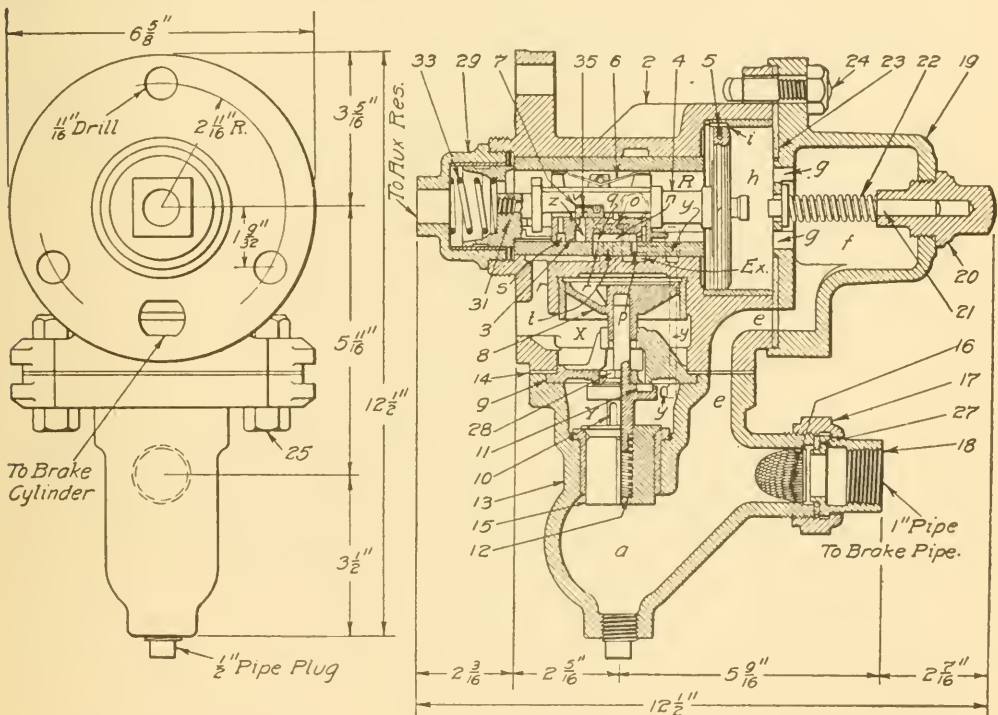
Westinghouse Type "K" Triple Valve, Shown in End View and Actual Section
